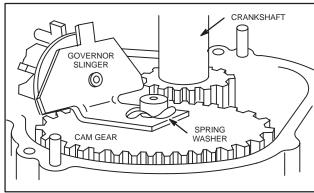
OIL SLINGER AND BRACKET VERTICAL CRANKSHAFT ENGINES
